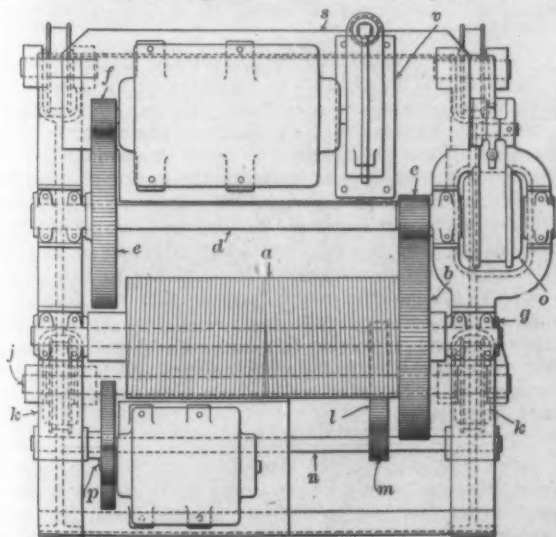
Plan View of a New Crane Trolley with No Overhanging Gears, Built by the Cleveland Crane & Engineering Company, Wickliffe, Ohio.
